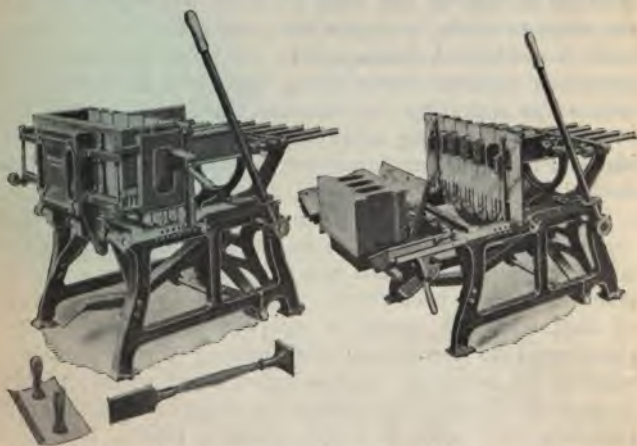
TWO VIEWS OF HAND TAMP FACE-DOWN BLOCK MACHINE WHICH MAY BE OPERATED UNDER POWER TAMPER
